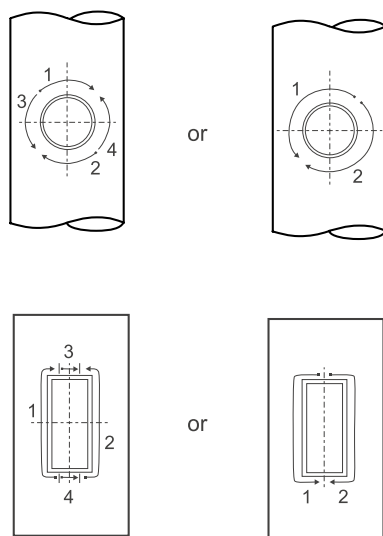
Recommended locations for the weld start/stop positions
